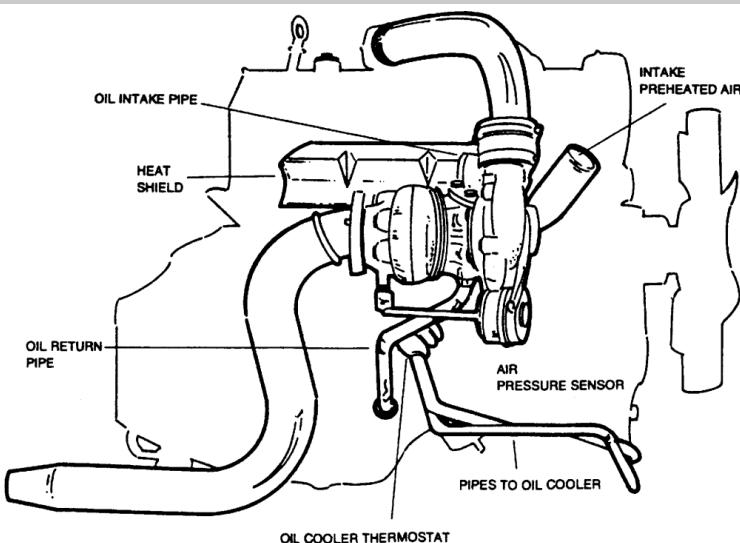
Turbocharger system component locations-B230FT engine
